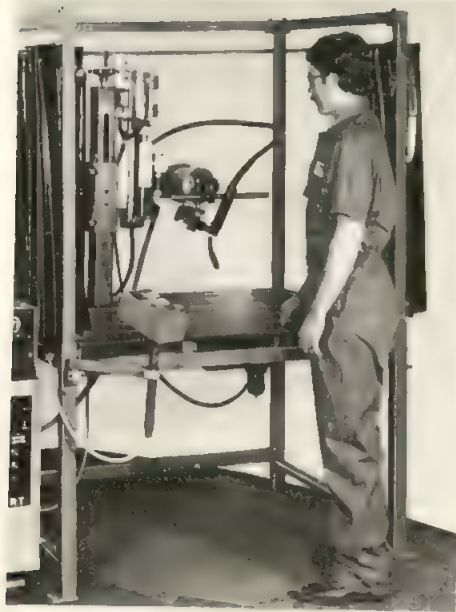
Flexible welding workstation with computer control.
